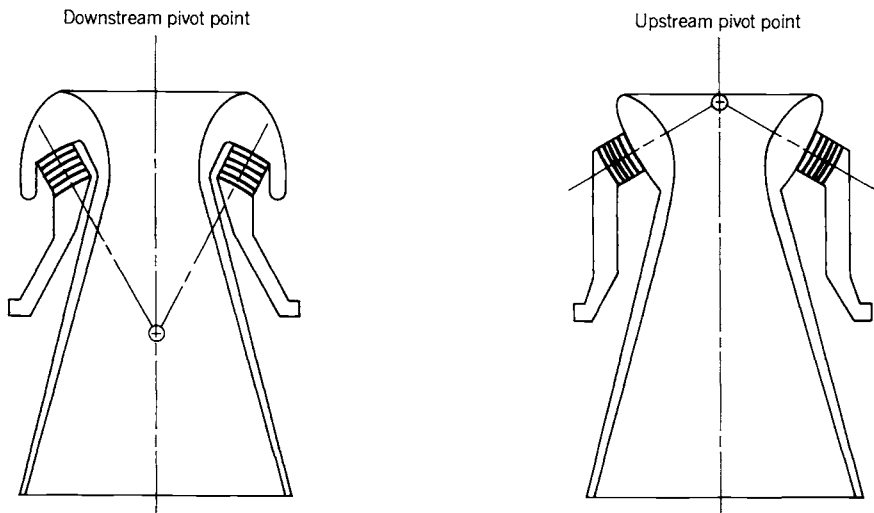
Two methods of using flexible nozzle bearings with different locations for the center of rotation. The bearing support ring is made of metal or plastic sheet shims formed into rings with spherical contours (white) bonded together by layers of molded elastomer or rubber (black stripes). Although only five elastomeric layers are shown for clarity, many flexible bearings have 10 to 20 layers. (Copied with permission from Ref. 16-1.)
